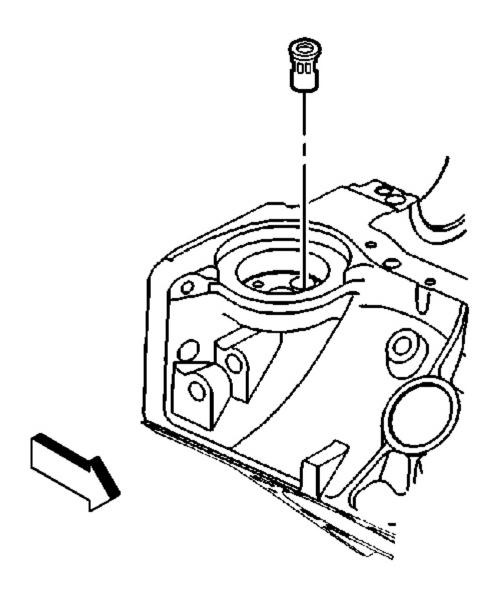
Identifying Oil Filter Bypass Valve Courtesy of GENERAL MOTORS CORP.
